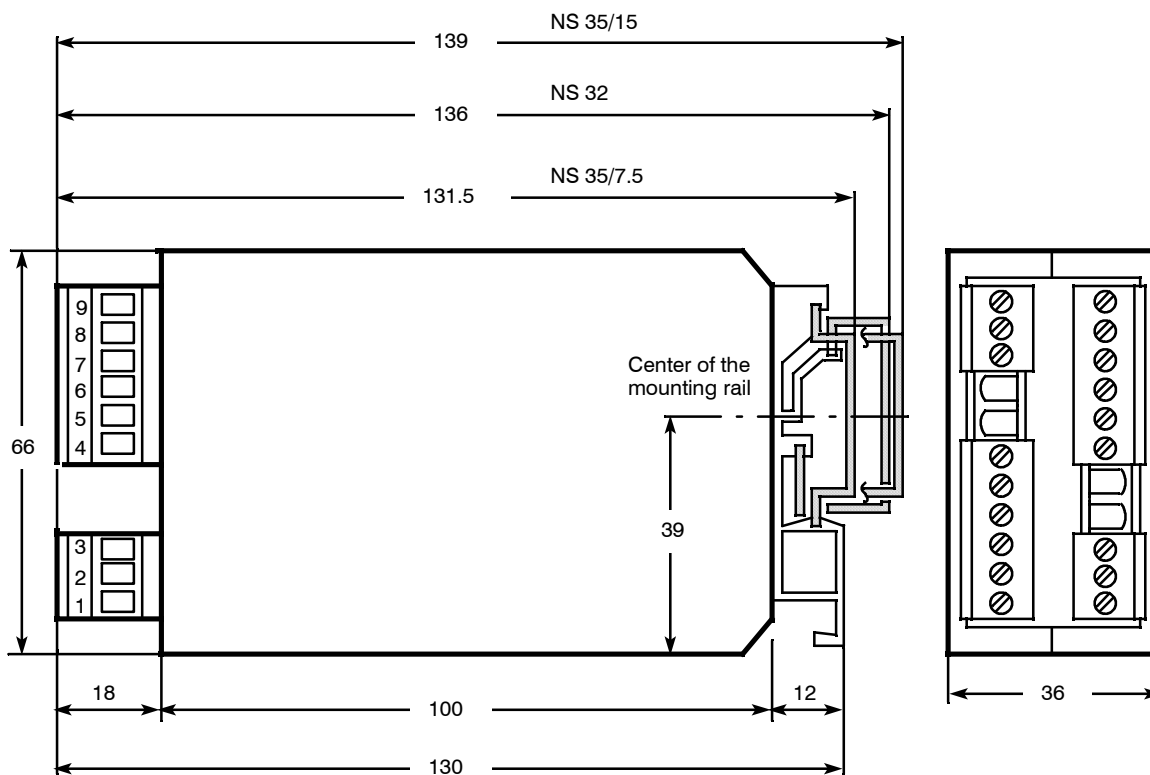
Dimensioned diagram coupling relay, dimensions in mm
